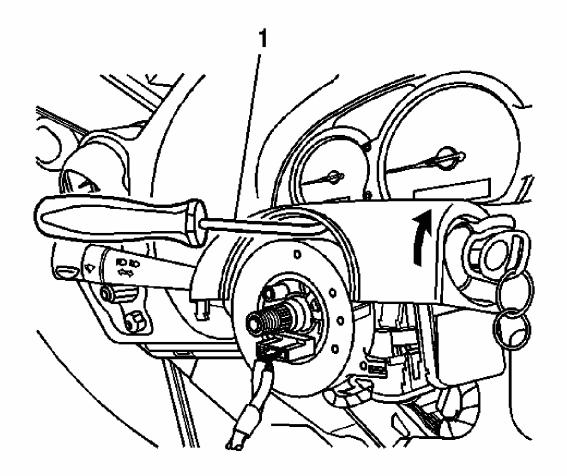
Inserting A173A Into Access Hole Of Ignition Lock Cylinder Courtesy of GENERAL MOTORS CORP.
